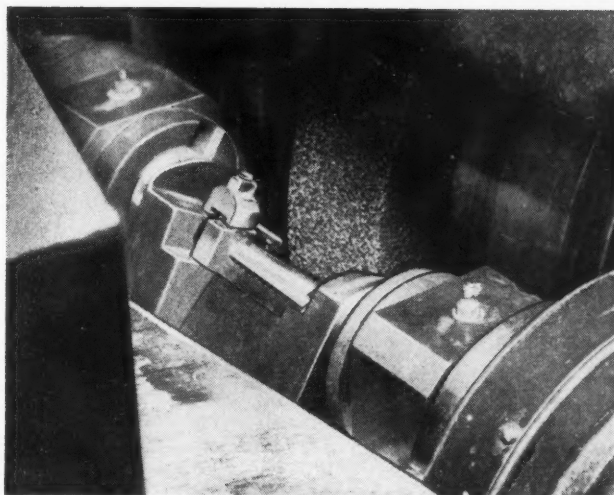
Close-up view of the modified centerless grinding machine employed to produce the convex form on turbine blades
